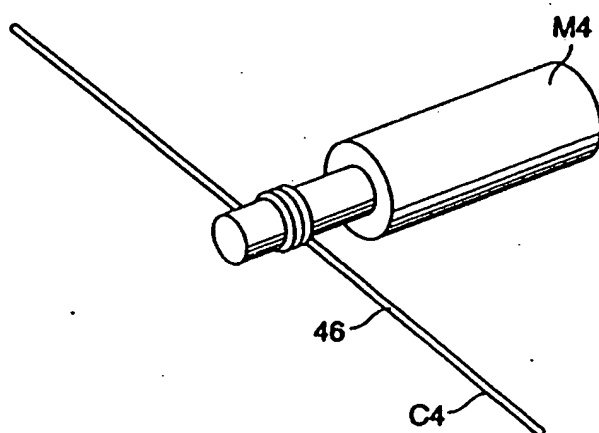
Cable drive used to convert rotatary to linear motion.
